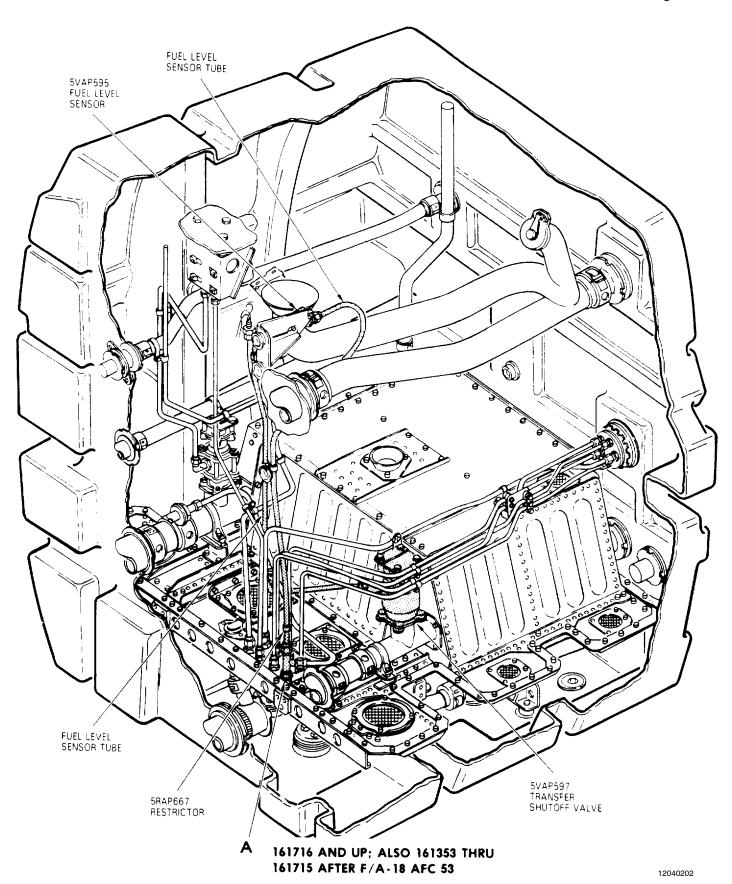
No. 2 Fuel Tank Cycle Test Troubleshooting Component Locator (Sheet 2)
